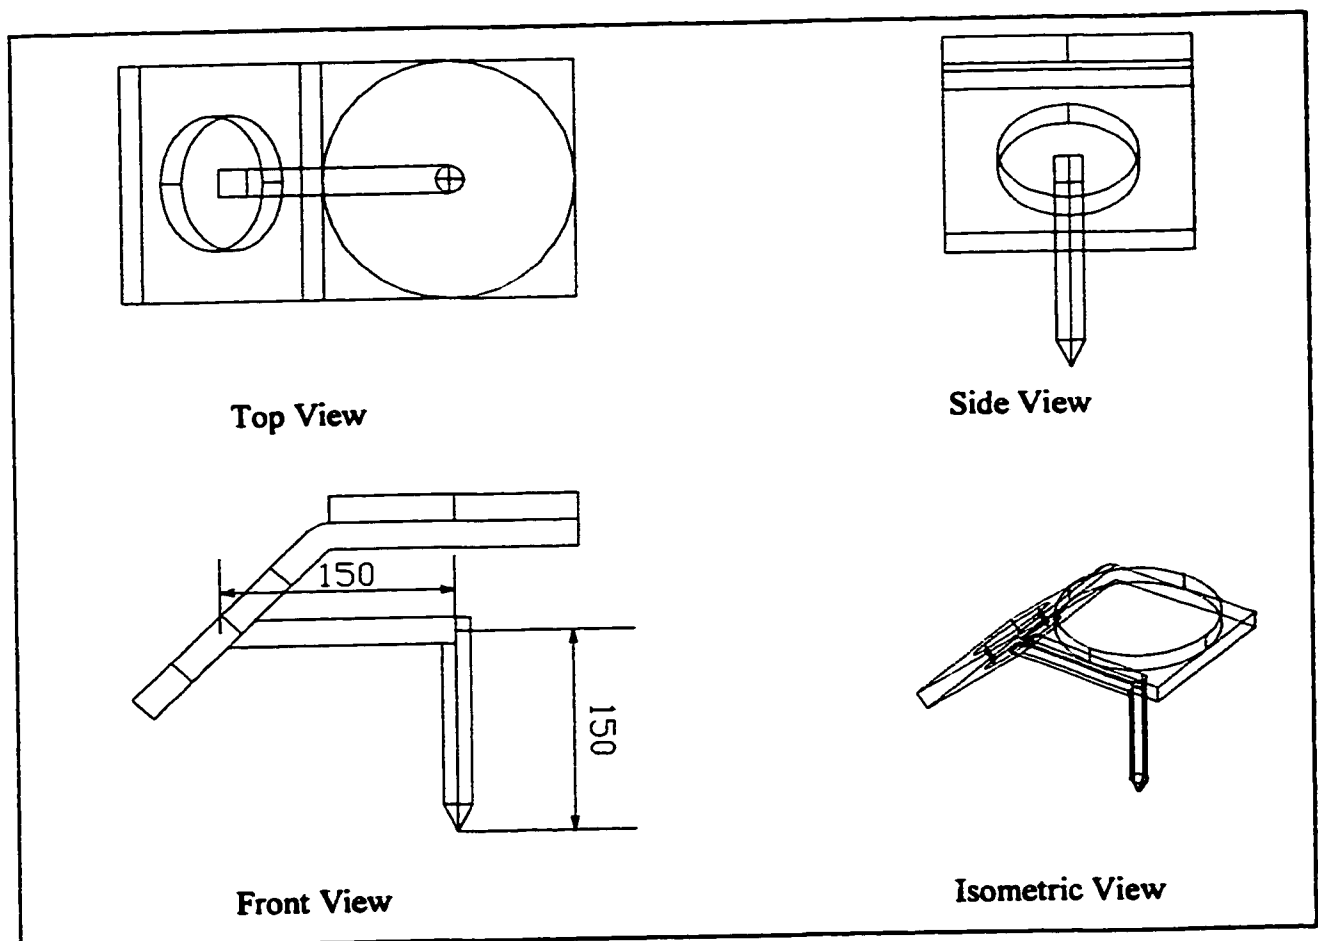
Draft of the Elbow and the Wrist-Tool Assembly
